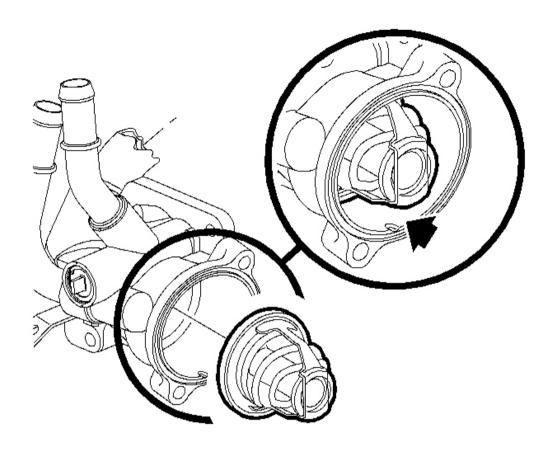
Exploded View Of Thermostat Courtesy of GENERAL MOTORS CORP.
